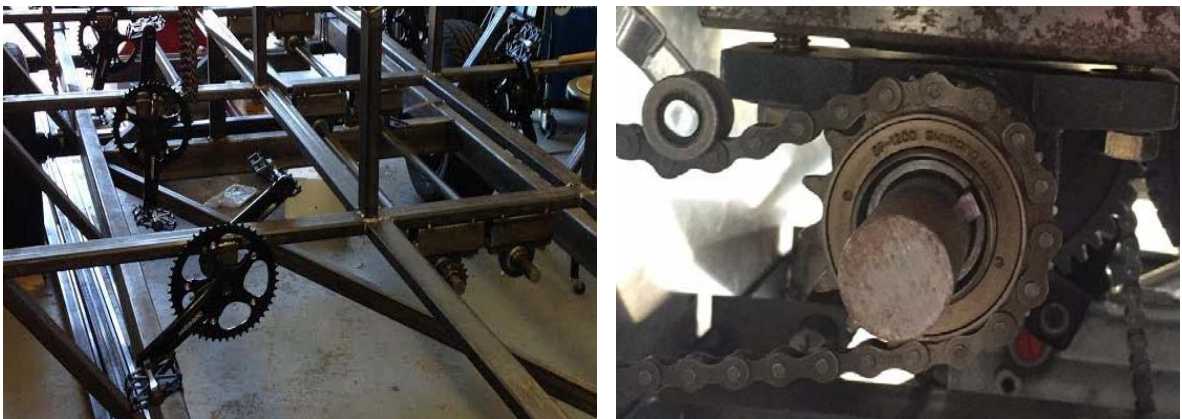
Cranks mounted on frame as well as the freewheels mounted on the shafts. Both systems aligned and coupled with a tensioned bicycle chain.
